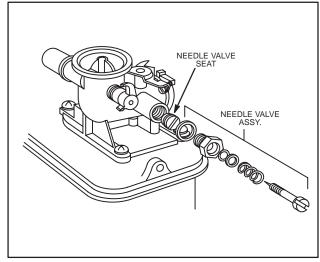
NEEDLE VALVE ASSEMBLY, ZINC BODY
